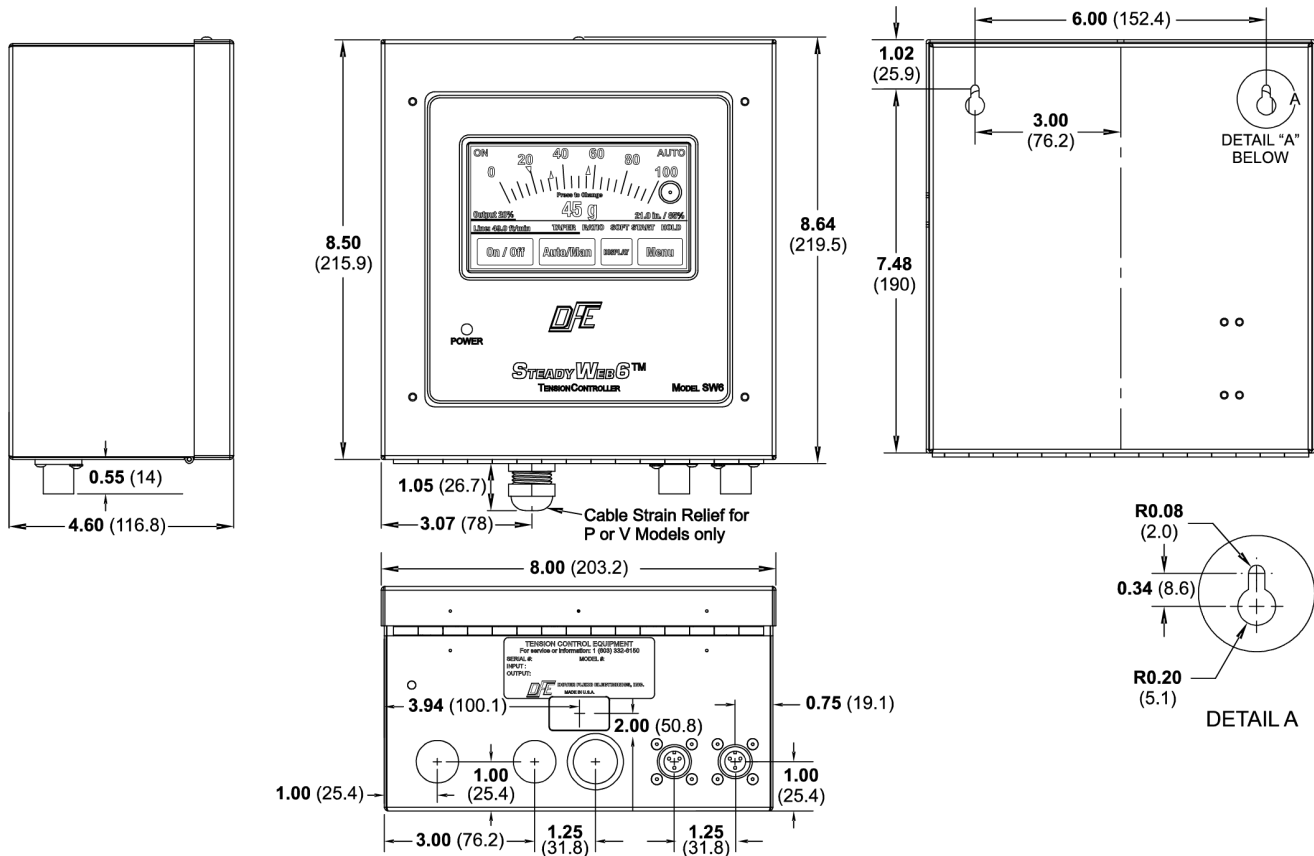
ENCLOSURE VERSION DIMENSIONS and VIEWS
